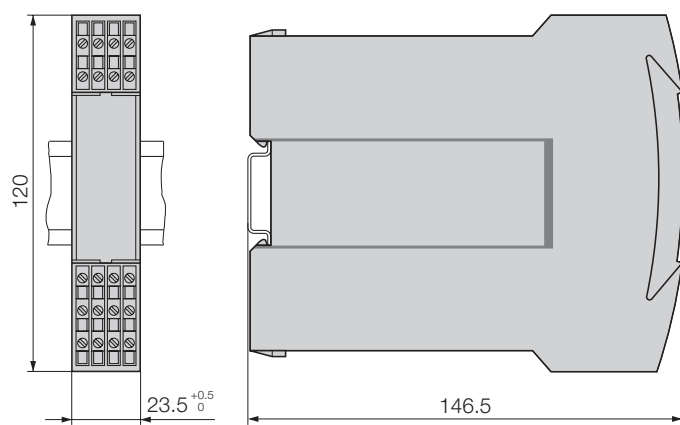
SINEAX SV 814 in housing S23 clipped onto a top-hat rail (35 × 15 mm or 35 × 7.5 mm, acc. to EN 50 022).
